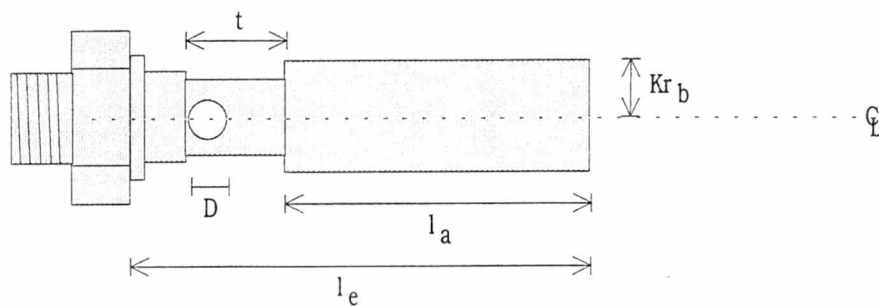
Dimensional Detail of Horizontal Cross Sectional Area of Bypass Insert.
